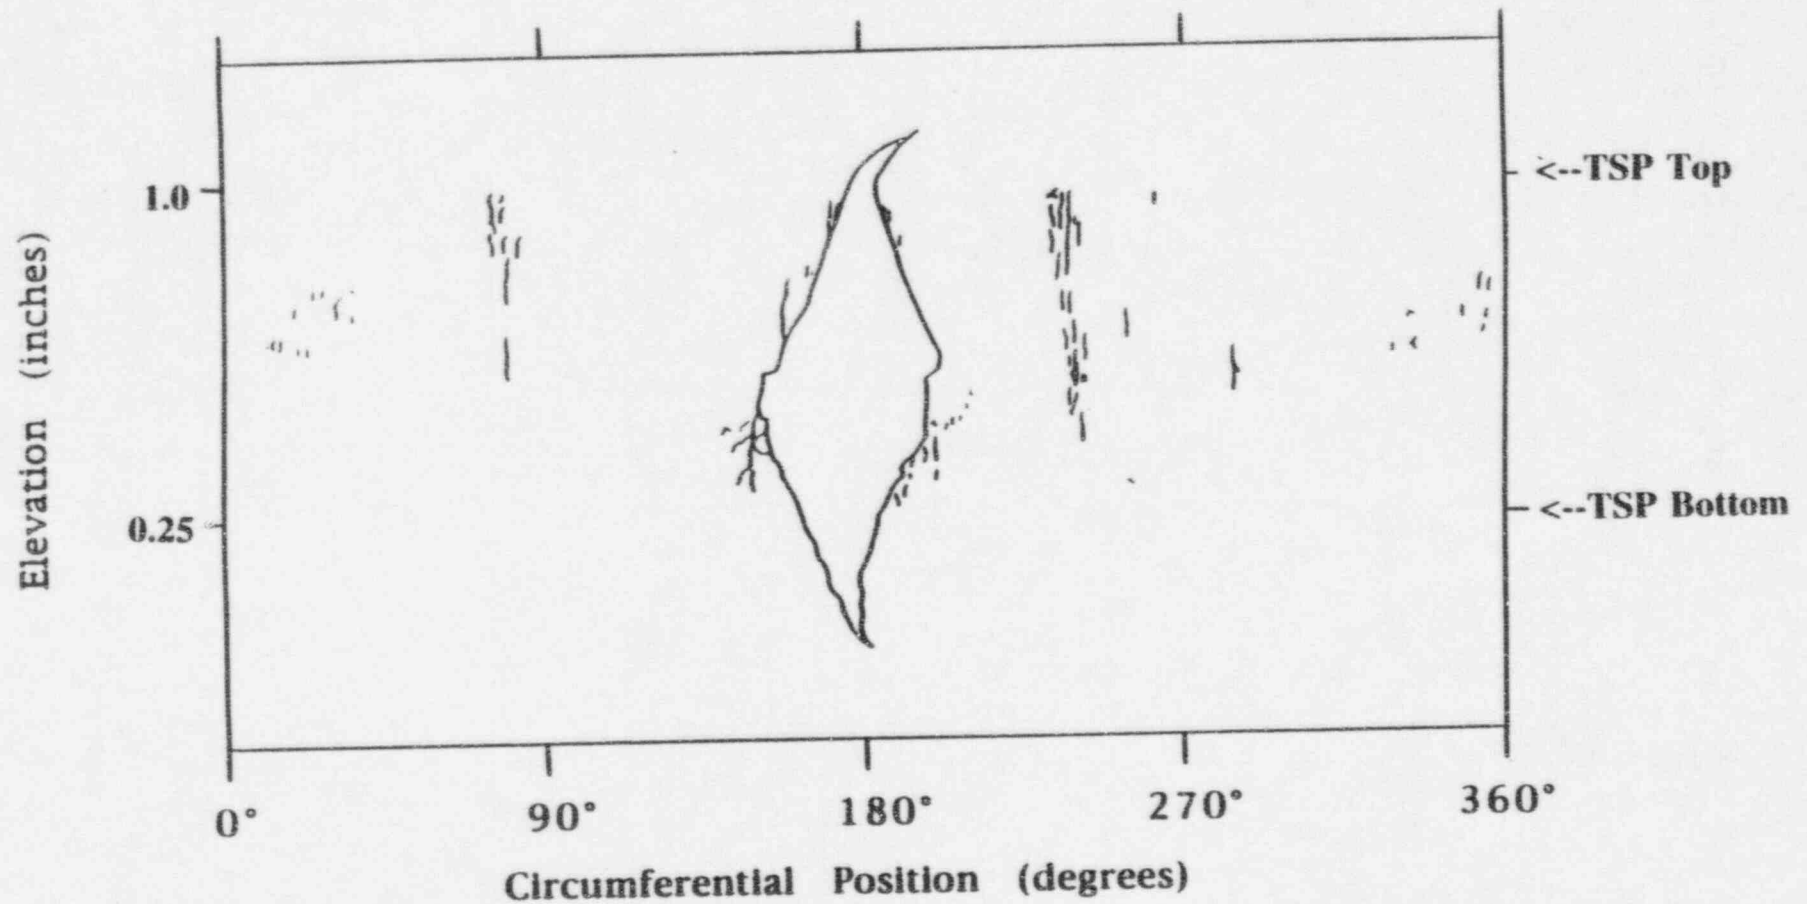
Sketch of the OD surface crack distribution found at the second tube support plate (TSP2) of Tube R11C61. Also shown is the location of the burst fracture opening. The burst opening extended beyond the TSP crevice region, but the corrosion cracking was confined to the crevice region.
